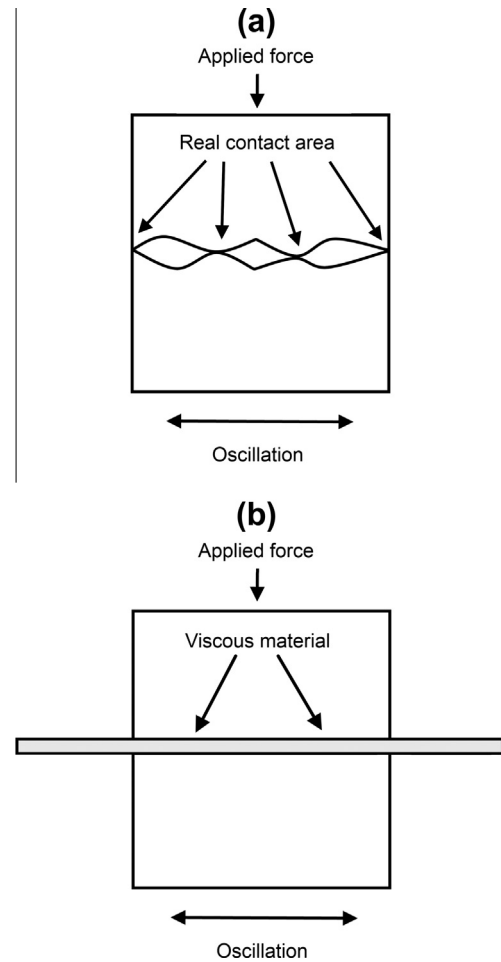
Key stages of the linear friction welding process: (a) asperity interaction (sliding friction) and (b) viscous material flow (sticking friction).
